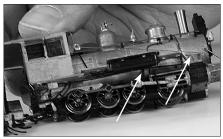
Remove the reach rod and steam chest lubricator wires.
